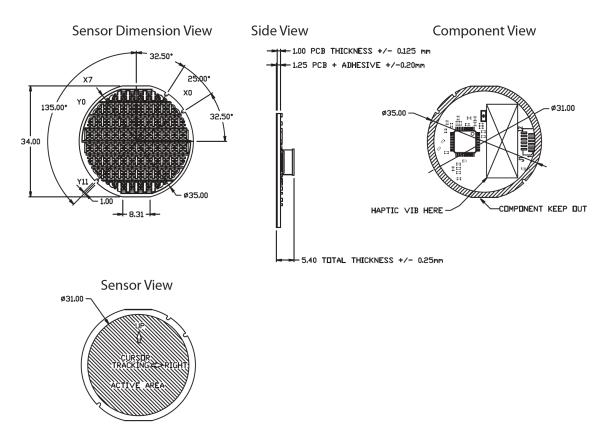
TM035035 Design Dimensions - Sensor Dimensions, Side, Component, and Side Views
